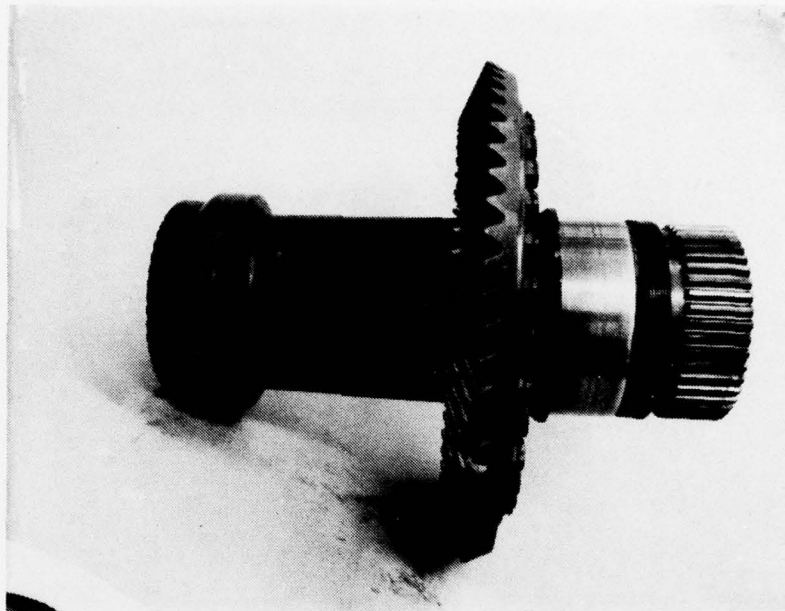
Main input gear and gearshaft after fourth loss-of-lube test.
